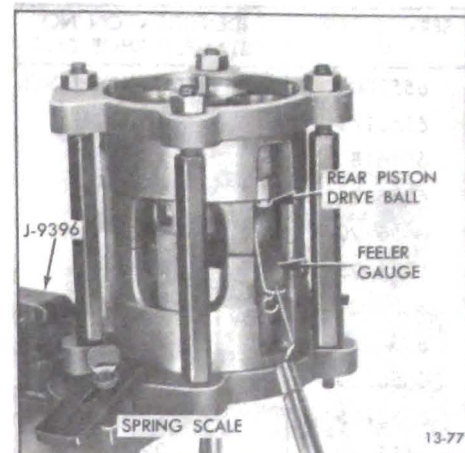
Checking "Drag" on Selected Feeler Gage Leaf with Spring Scale
